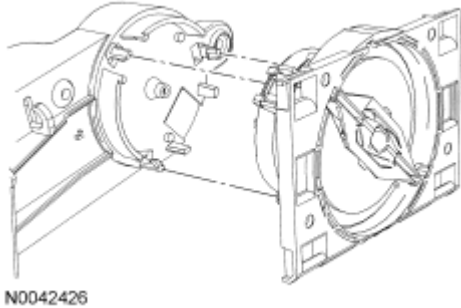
Identifying Exterior Rear View Mirror Motor From Clips On Bracket
